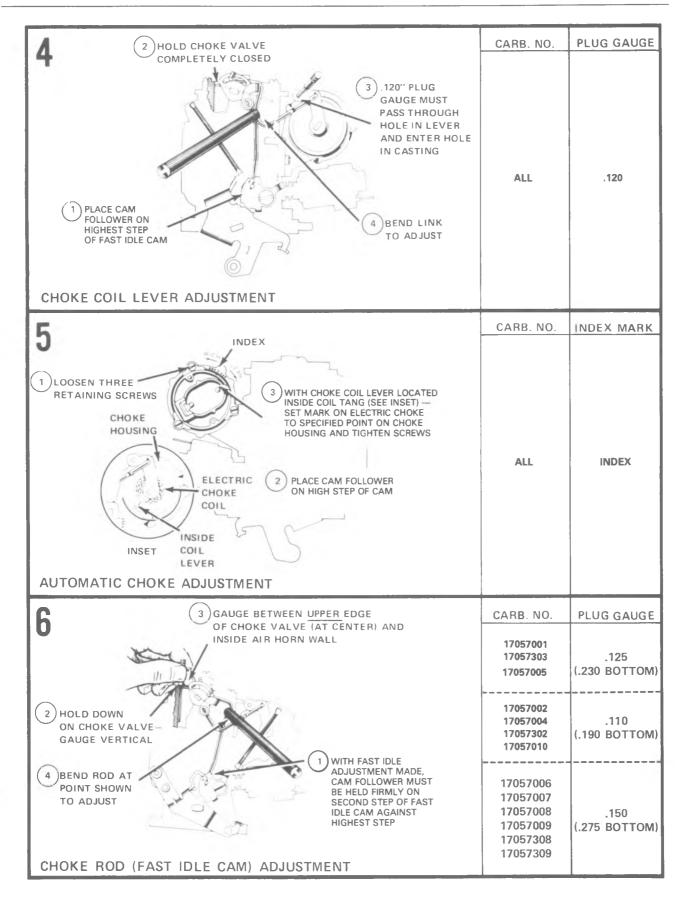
C-10--1ME Carburetor Adjustments - 2 of 3
